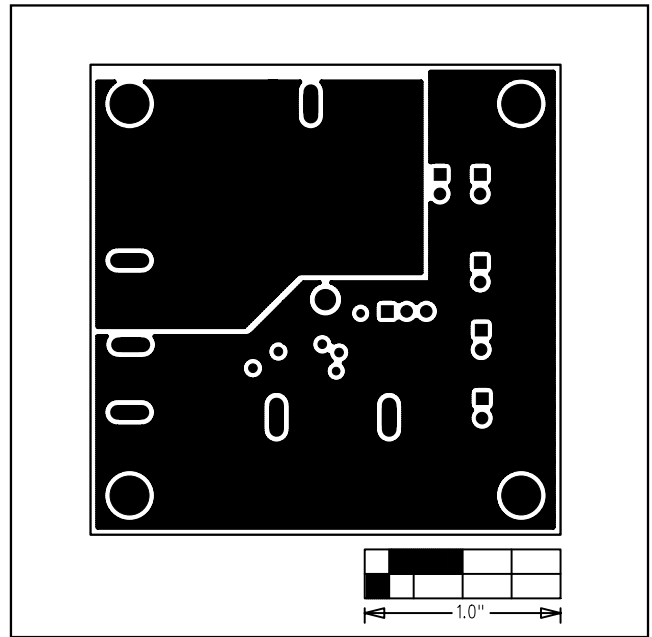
MAX1515 EV Kit PC Board Layout—Inner Layer 3 (GND, PGND)
